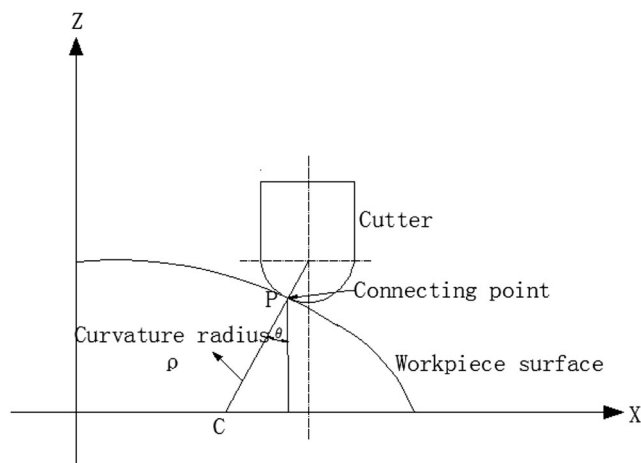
The inclination θ formed between cutter axis and workpiece surface
